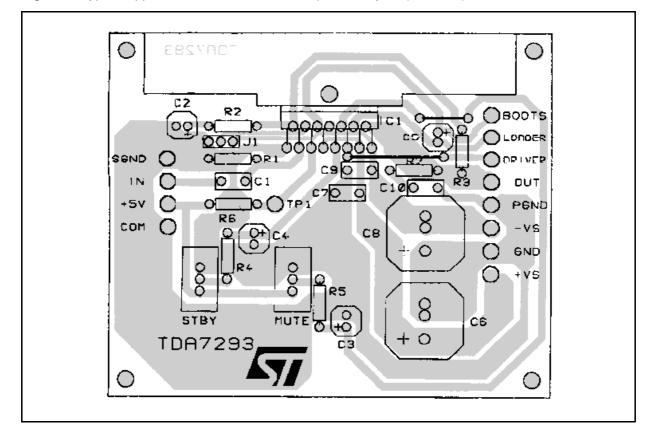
Typical Application P.C. Board and Component Layout (scale 1:1)
